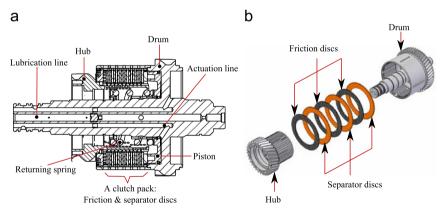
The configuration of a multi-disc wet friction clutch, (a) cross-sectional and (b) exploded view.
